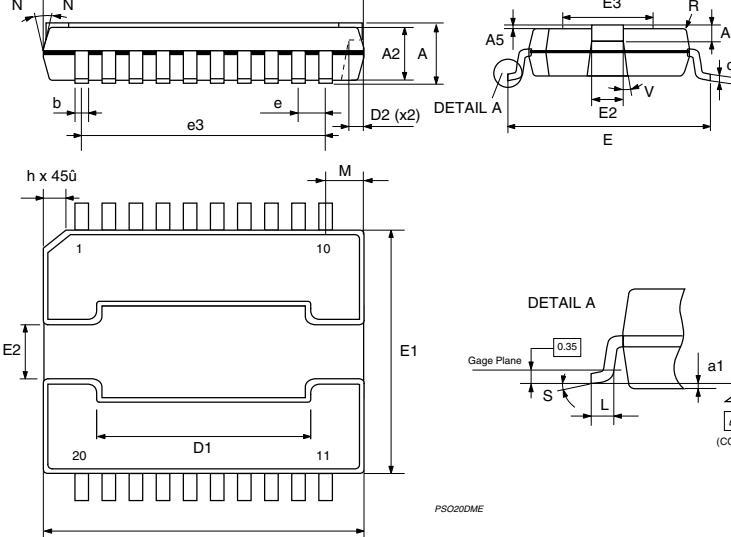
PowerSO20 (slug up) mechanical data and package dimensions
